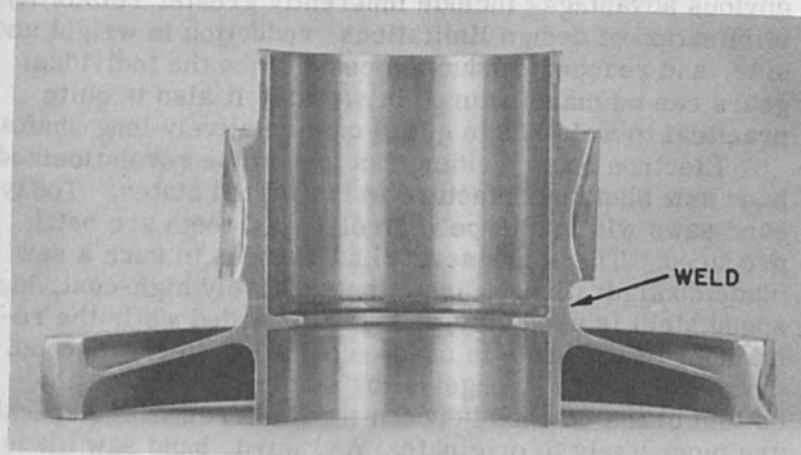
Electron Beam Welded Aircraft Gear.
